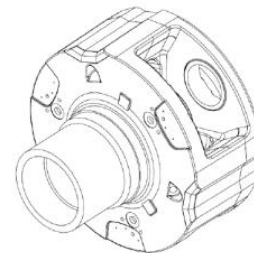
Isometric view of the Gamesa's planet carrier for the gearbox.
